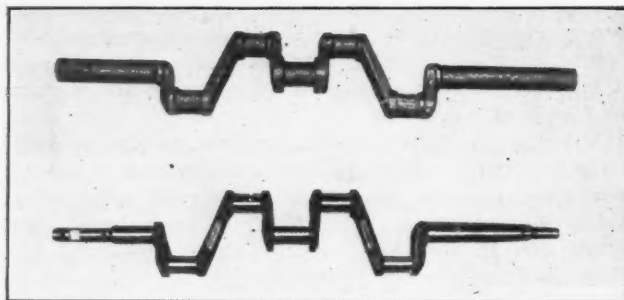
One of the Finished Crankshafts and the Rough Drop-forging
